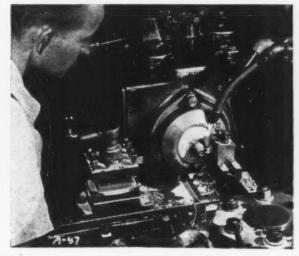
Facing front edge of bushing and machining a 45° bevel on outside edge. Use of tubing instead of bar stock eliminated drilling and reaming.
